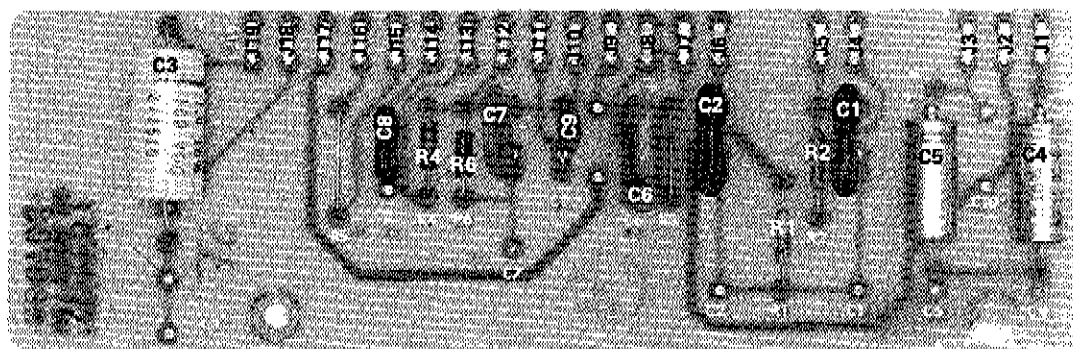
PCB ASSEMBLY, 19.2 kHz (-08 Option)
